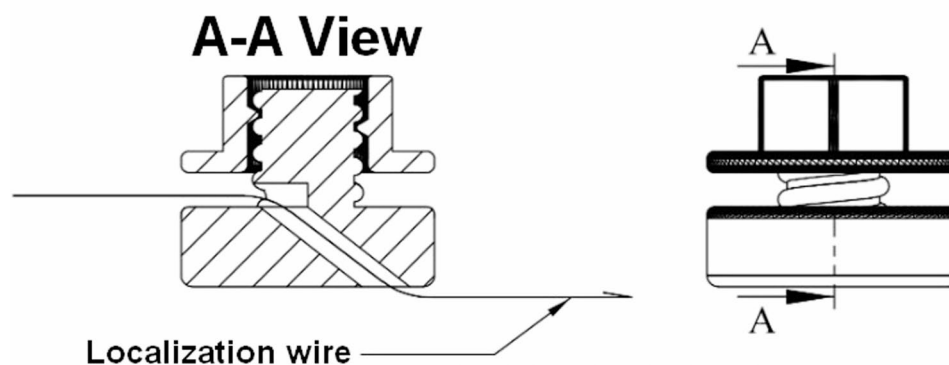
A-A View of the screw mechanism. Cross-sectional view demonstrating the wire path through the mechanism. The wire enters through the top, curves through the elliptical channel, and exits at the bottom, secured by the threaded locking system
